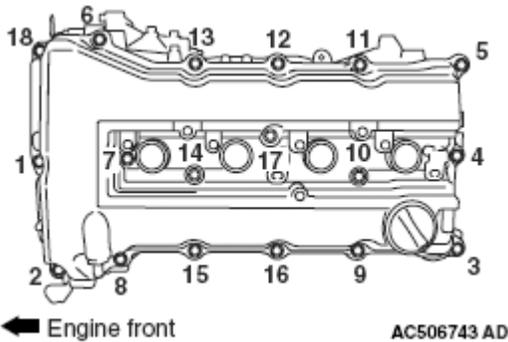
Identifying Rocker Cover Assembly Mounting Bolts & Loosening Sequence
